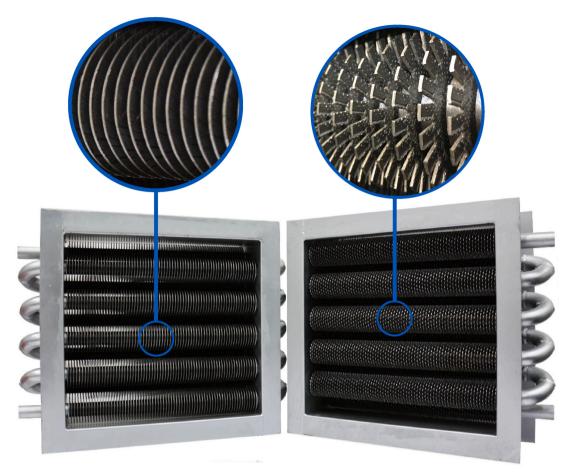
The tested plain welded spiral fin-and-tube heat exchanger (left) and serrated welded spiral fin-and-tube heat exchanger (right).
